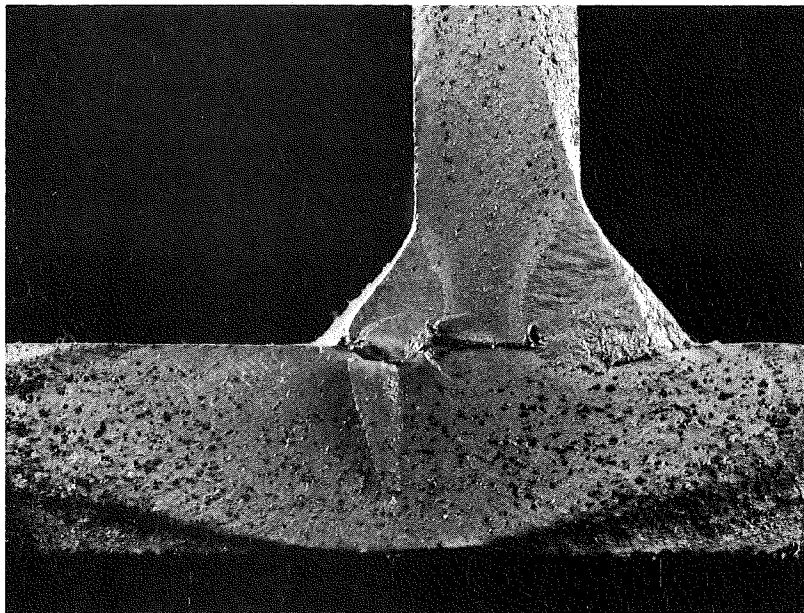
Crack initiation from lack of fusion of the fillet weld in the flange (x3)
